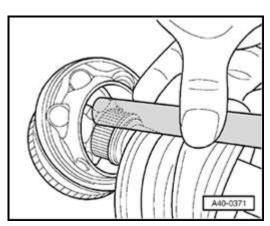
Striking Copper Or Brass Drift On CV Joint Inner Race With Hammer Courtesy of VOLKSWAGEN UNITED STATES, INC.
